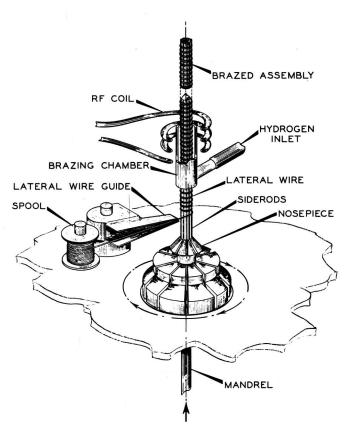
Apparatus used for fabrication of conventional pencil-tube grids.
